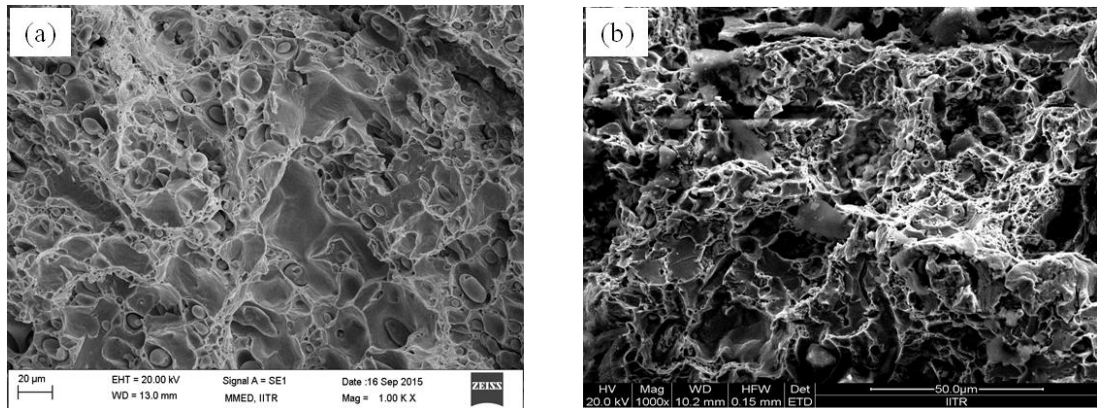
Tensile fracture surfaces of powder forged specimens by SEM of (a) Fe-0.65 wt. %P and (b) Fe-0.65 wt. %P-0.20wt. %C showing ductile dimple failure.
